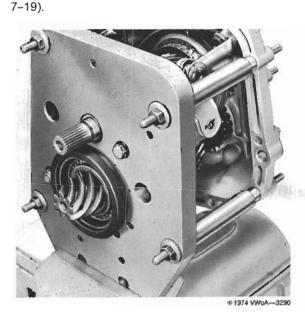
Special retaining nut used on the pinion bearing of the late transmission.
